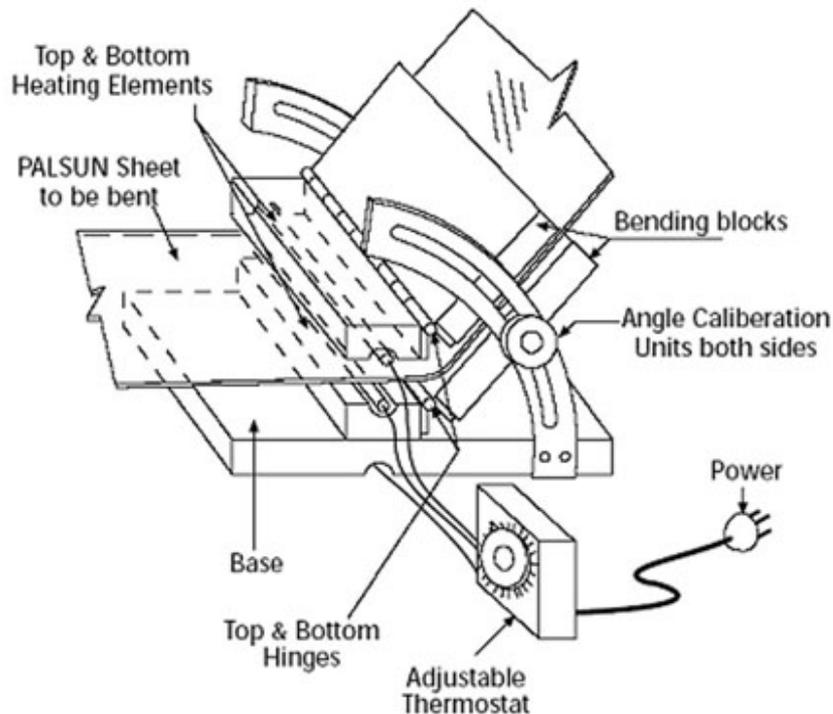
Hot line bending with bending machine, (www.plastiglas.com.mx.pdf, p. 26)
